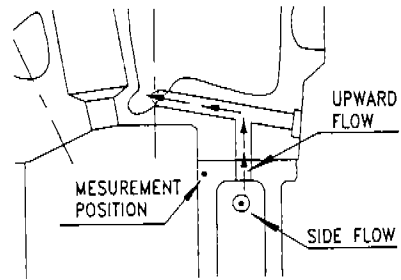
Change of coolant flow pattern with and without drilled w/passage
